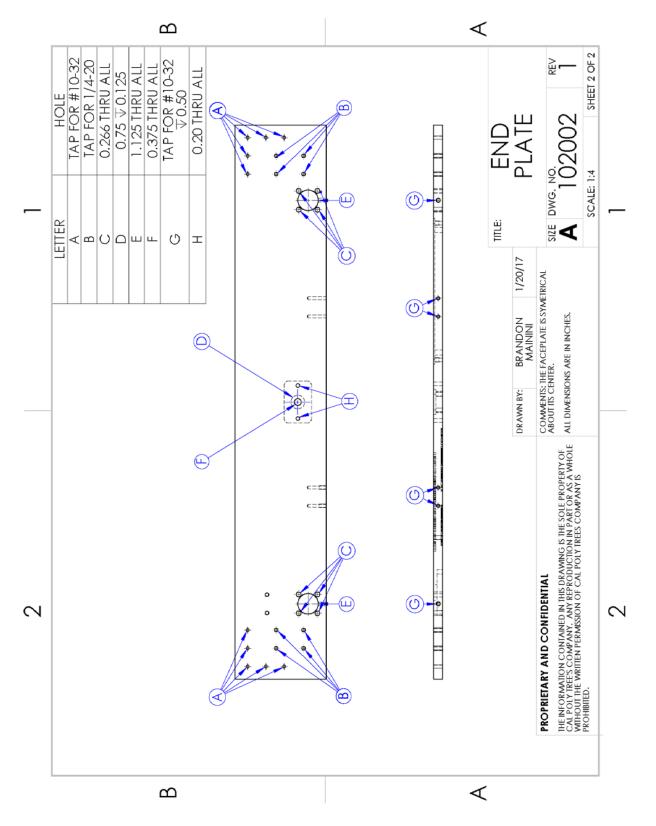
End Plate Detail Drawing Sheet 2 of 2
